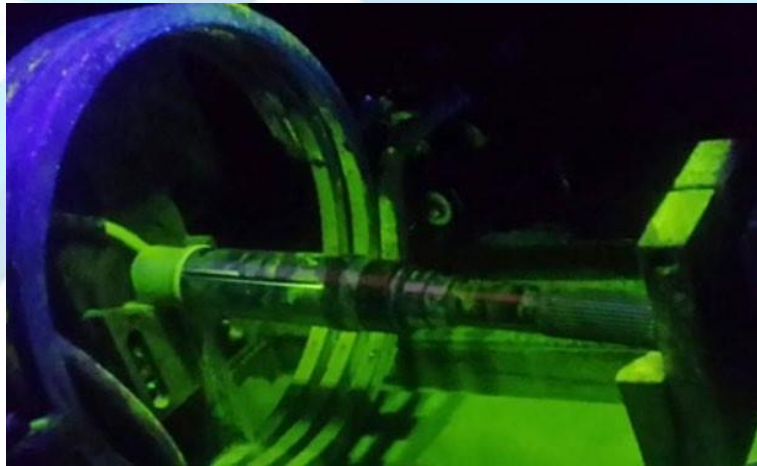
Application of the magnetic particle inspection method on milled shafts
